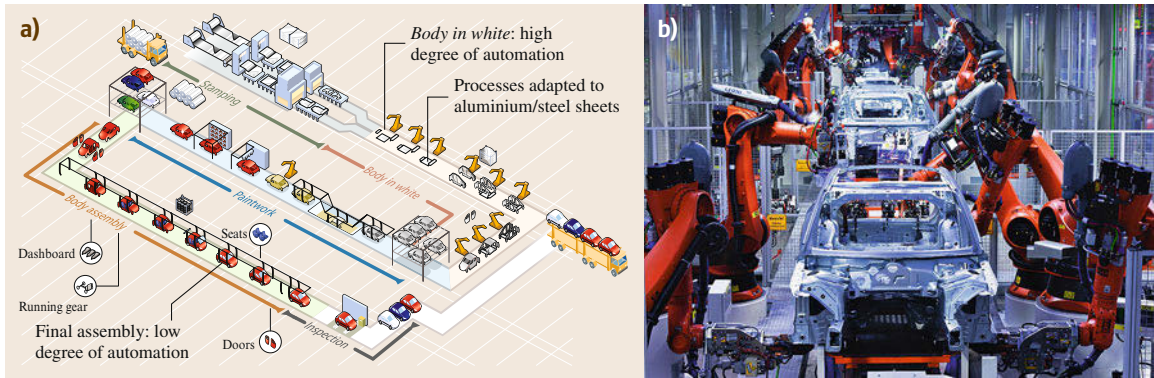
,b Car production (a) usually follows the illustrated steps along the assembly line: Stamping of the metal sheet into plates, fixing and alignment of the plates on trays, spot welding, painting the car body, and final assembly of the car body (doors, dashboard, windscreens, power-train seats, and tires). Car factories can host over 1000 industrial robots working typically three shifts per day (courtesy of PSA Peugeot Citroën, Paris and Art Movies, Paris). The Audi plant in Ingolstadt Germany (b) is highly automated. The picture shows spot welding robots along the *body-in-white* transfer line. Trays carrying car bodies pass through the *robot garden
